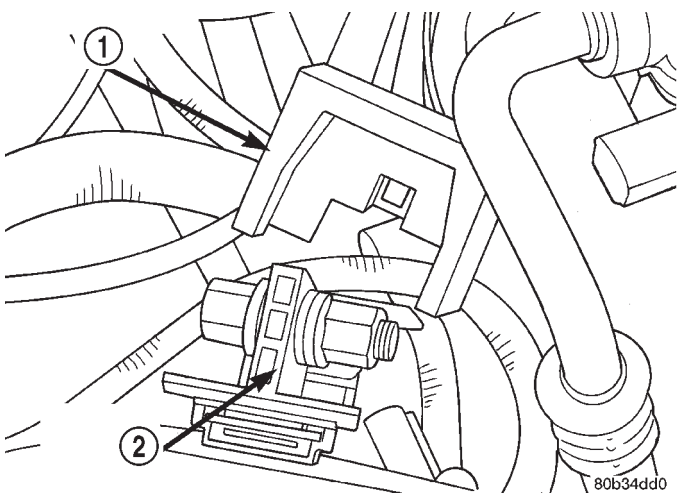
POSITIVE JUMPER START ATTACHMENT
